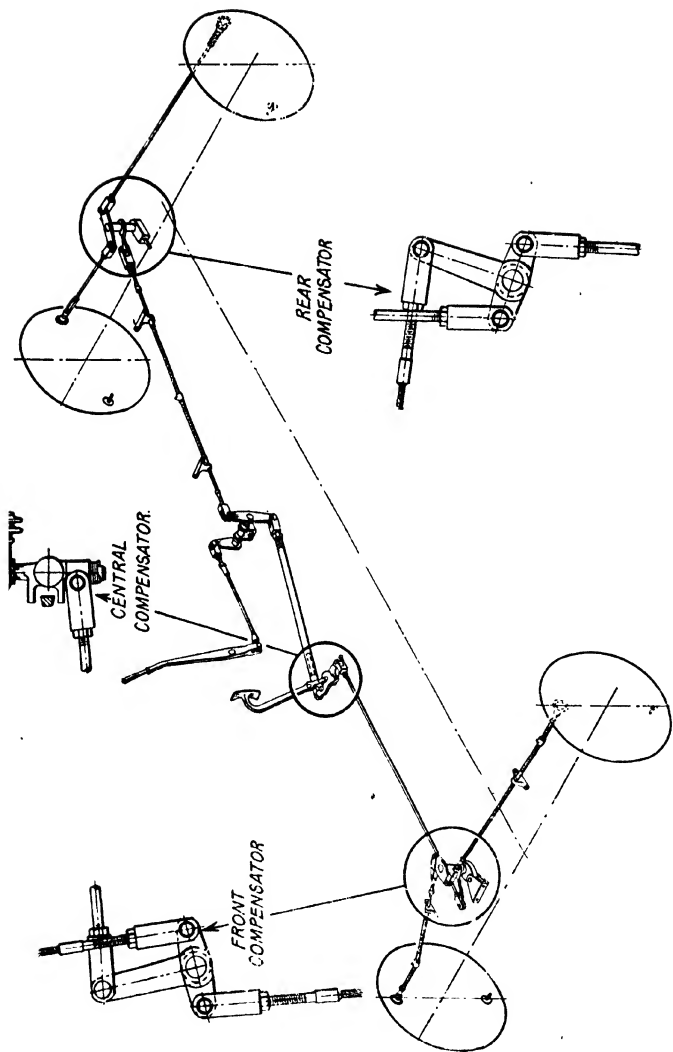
A TYPICAL BENDIX-COWDREY OPERATING GEAR WITH THE THREE COMPENSATING DEVICES (IN CIRCLES) PICKED OUT AND ENLARGED TO SHOW THE MECHANISM CLEARLY
